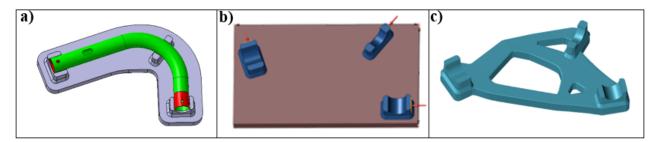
Optimization process of check form tool, a) conventional design, b) design space model, c) optimized model.
